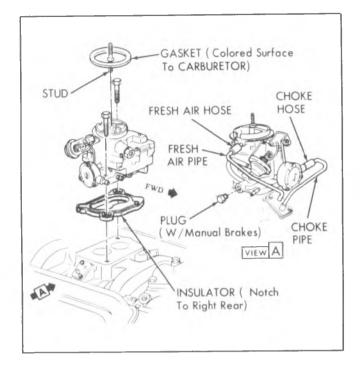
C-28--Carburetor and Choke Pipes V8.2Bb1
